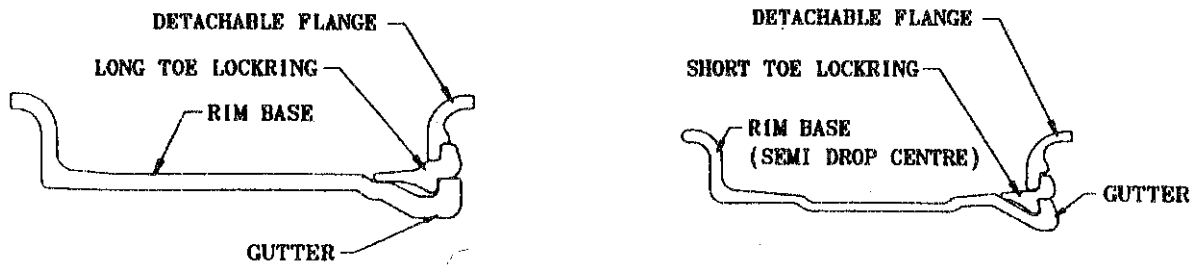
THREE-PIECE RIM NOMENCLATURE
